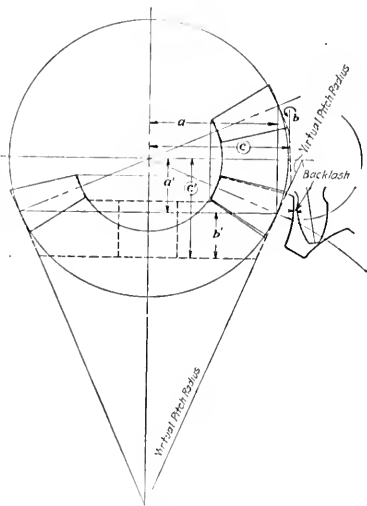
THEORETICAL CONSTRUCTION OF BEVEL GEAR, WITH CONVENTIONAL LAYOUT SHOWN IN DOTTED LINES
